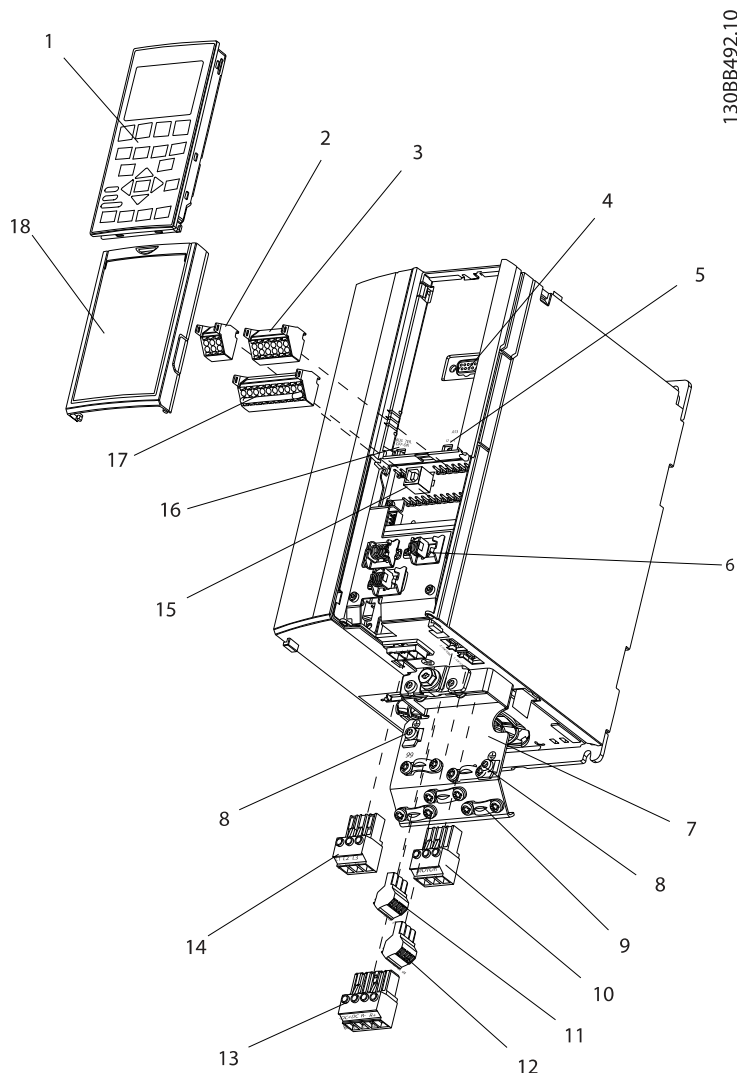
Exploded View Unit Sizes 12-13, IP20
